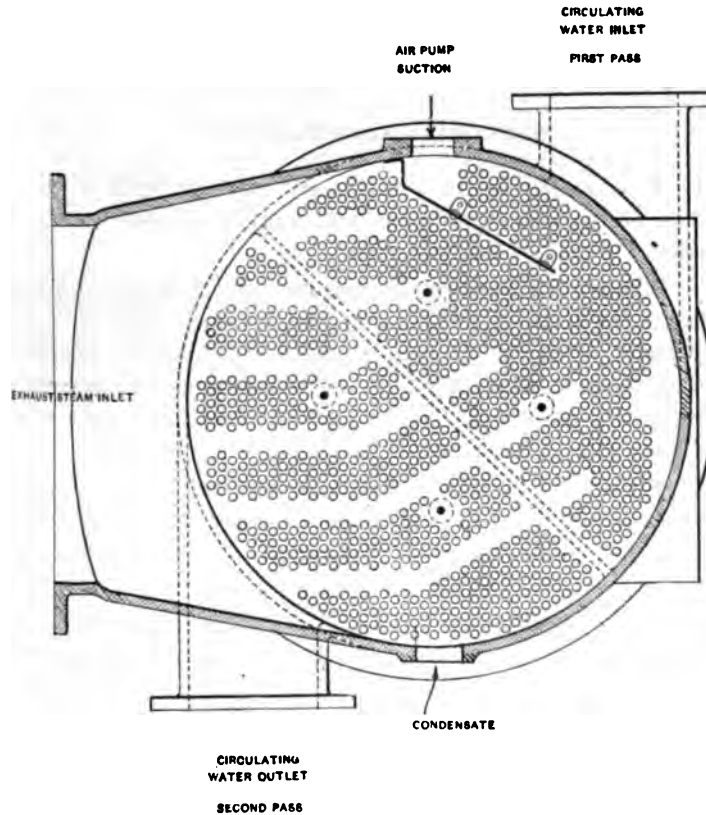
WELL-DESIGNED CYLINDRICAL CONDENSER
